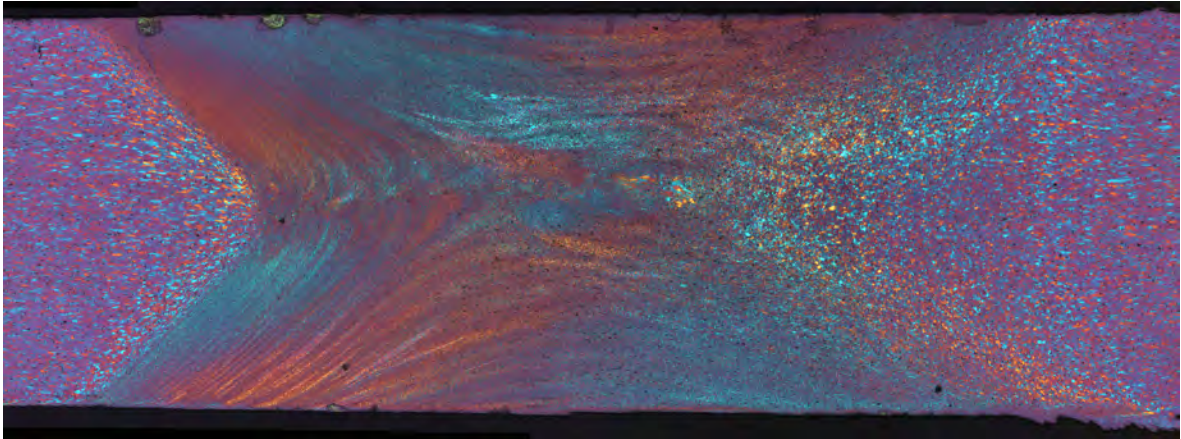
Typical microstructure of joints with welded with the improved tool
